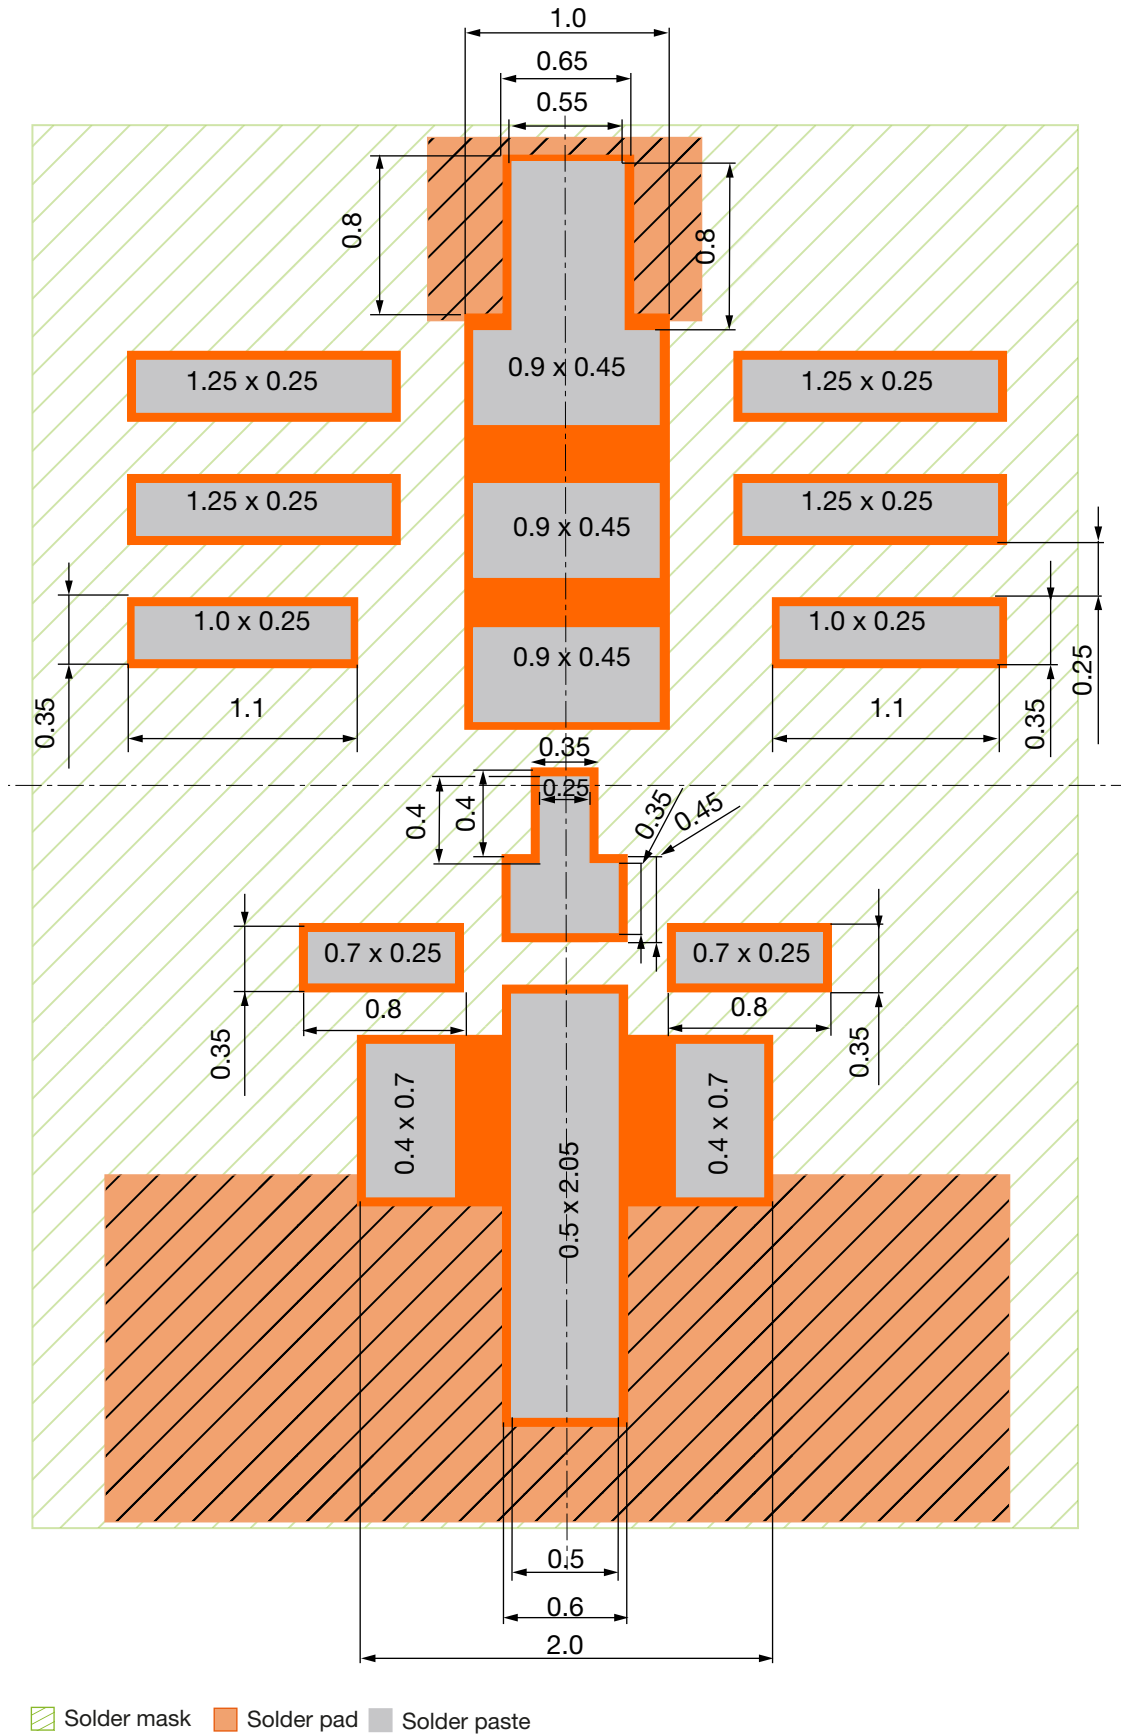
Recommended solder pad design for operating entirely with the internal IC
